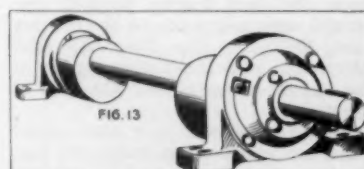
Example of drive shaft with off-center weights for vibrating screen frame on which the shaft is mounted—Universal Vibrating Screen Co.
